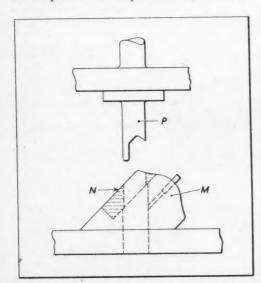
Press tool for cutting the spoon slot in the jar cover
